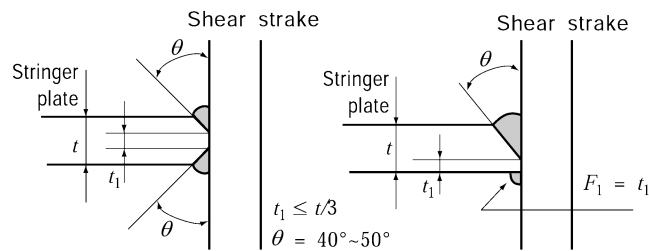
Welding construction of joints between shear strakes and stringer plates of strength deck
